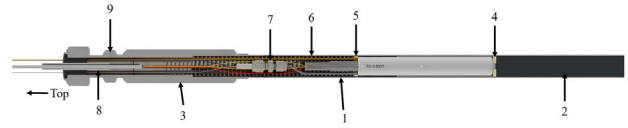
Cross-section view of the MRTI outer can containment design. 1.) Outer can geometry, 2.) graphite spacer, 3.) Outer can top fitting, 4.) Bottom insulation spacer, 5.) Top insulation spacer, 6.) compression springs, 7.) Swagelok fitting, 8.) Leadout potting cup, and 9.) Top compression seal fitting.
